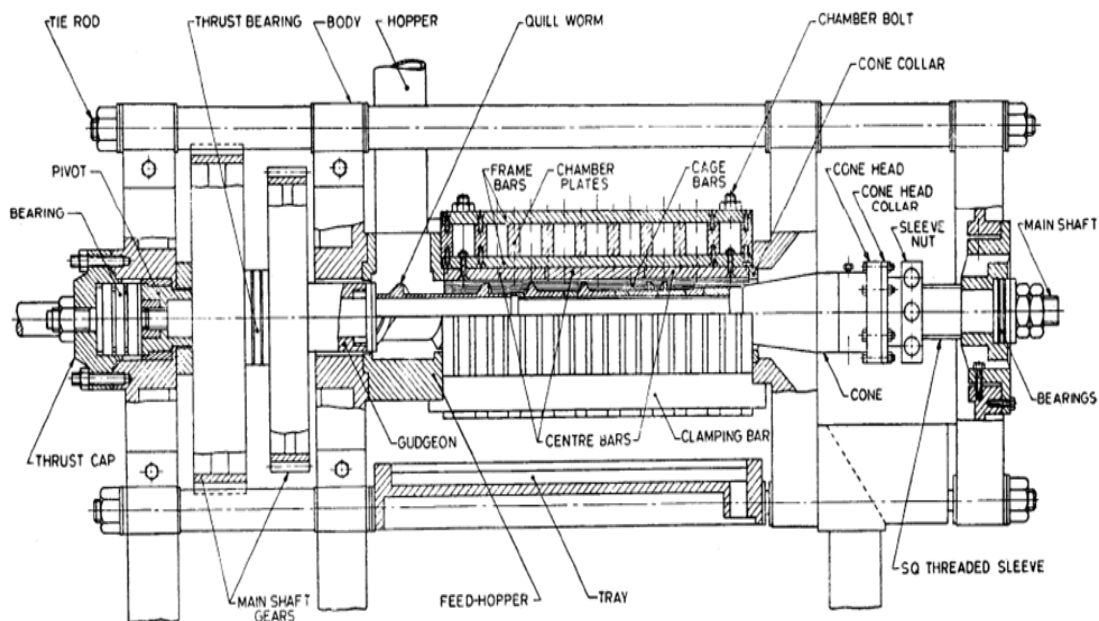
NOMENCLATURE AND ASSEMBLY OF DOUBLE GEAR OIL EXPELLER
